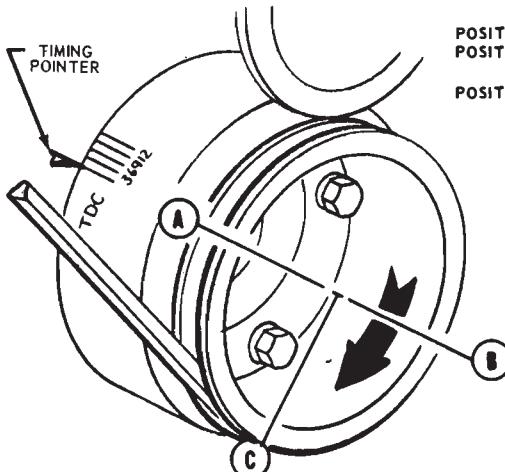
Position of Crankshaft for Checking Valve Clearance and Installing Rocker Arms
